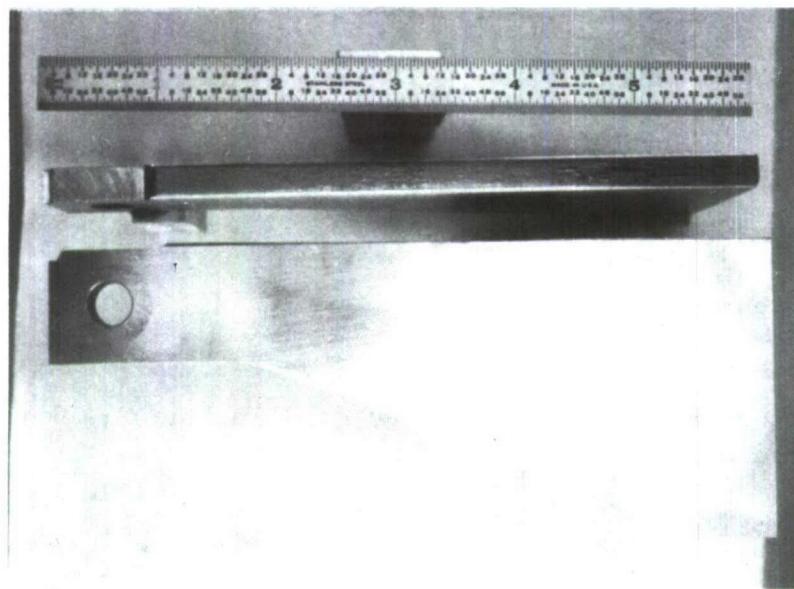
Fracture Surface of a Fatigue Crack Growth Mostovoy DCB Specimen Tested in Laboratory Environment
